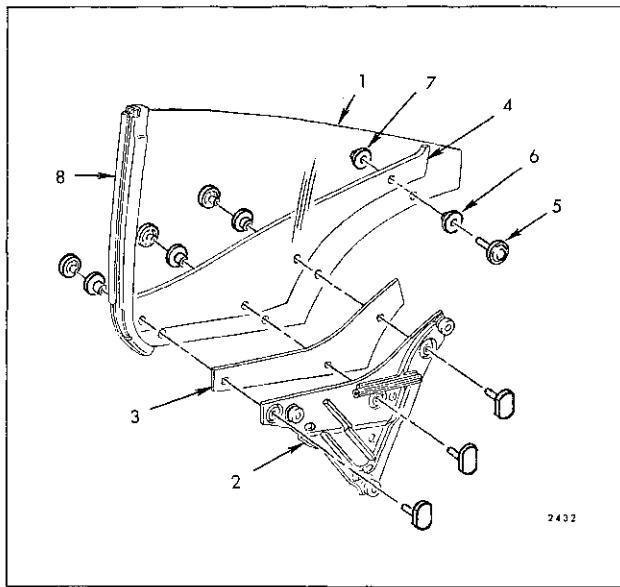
Rear Quarter Window Assembly - "B-87" Styles
